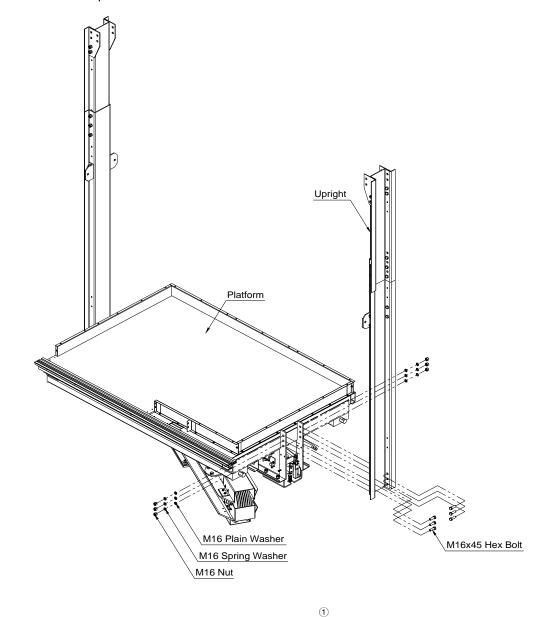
UPRIGHT INSTALLATION (Underslung Skewed type)
